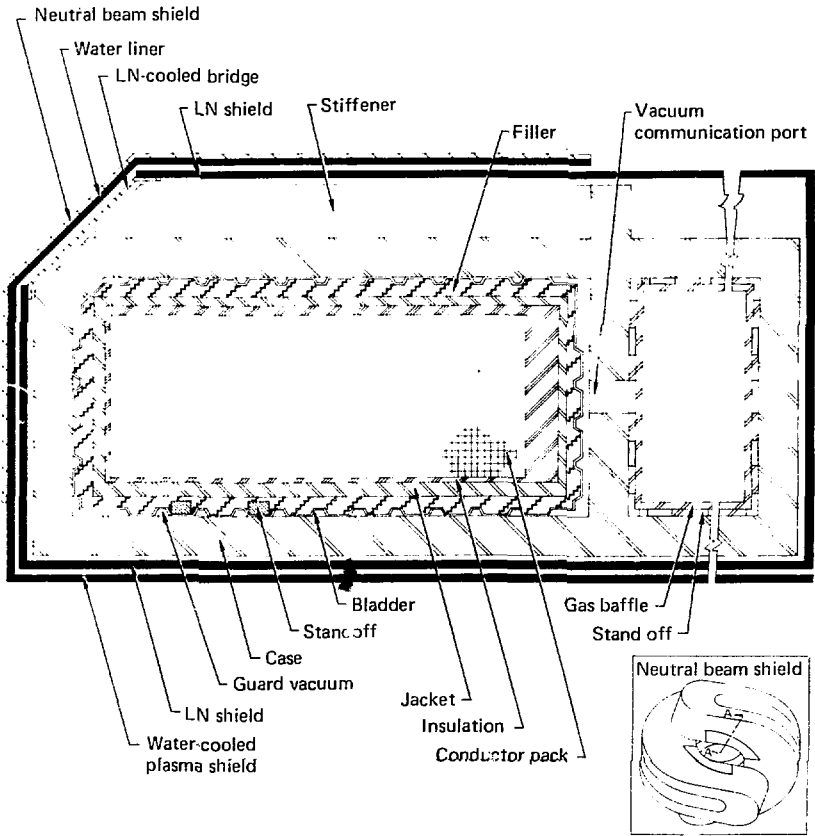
Sectional ("A-A") view of the magnet showing its construction and thermal shields.
